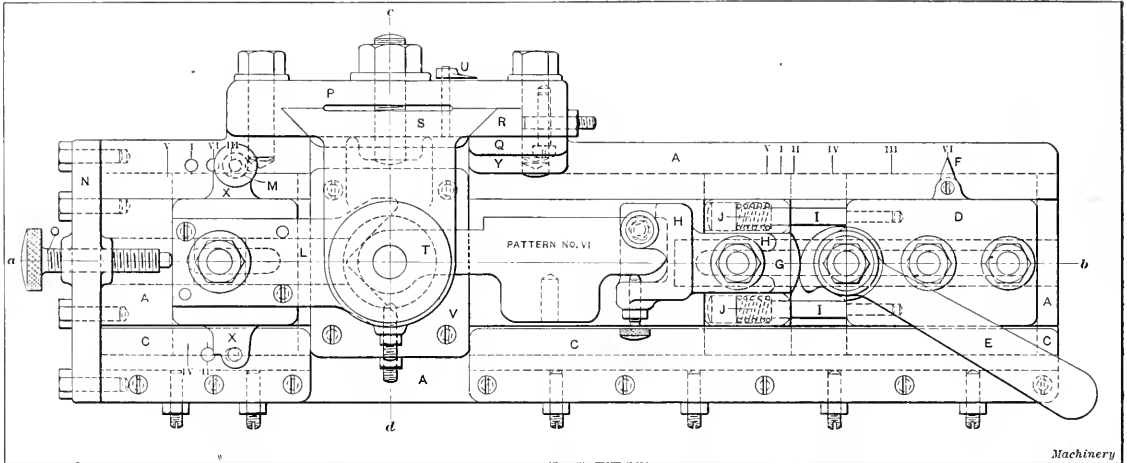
Plan View of the Jig, showing Adjustable Slides for holding Different Kinds of Work
